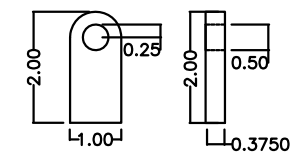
DETAIL B-B - LATCH CUTOUT (NOT TO SCALE)
